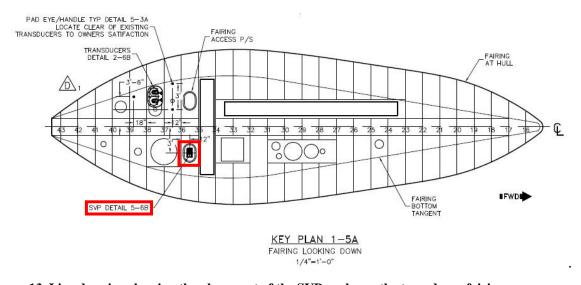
Line drawing showing the placement of the SVP probe on the transducer fairing.
